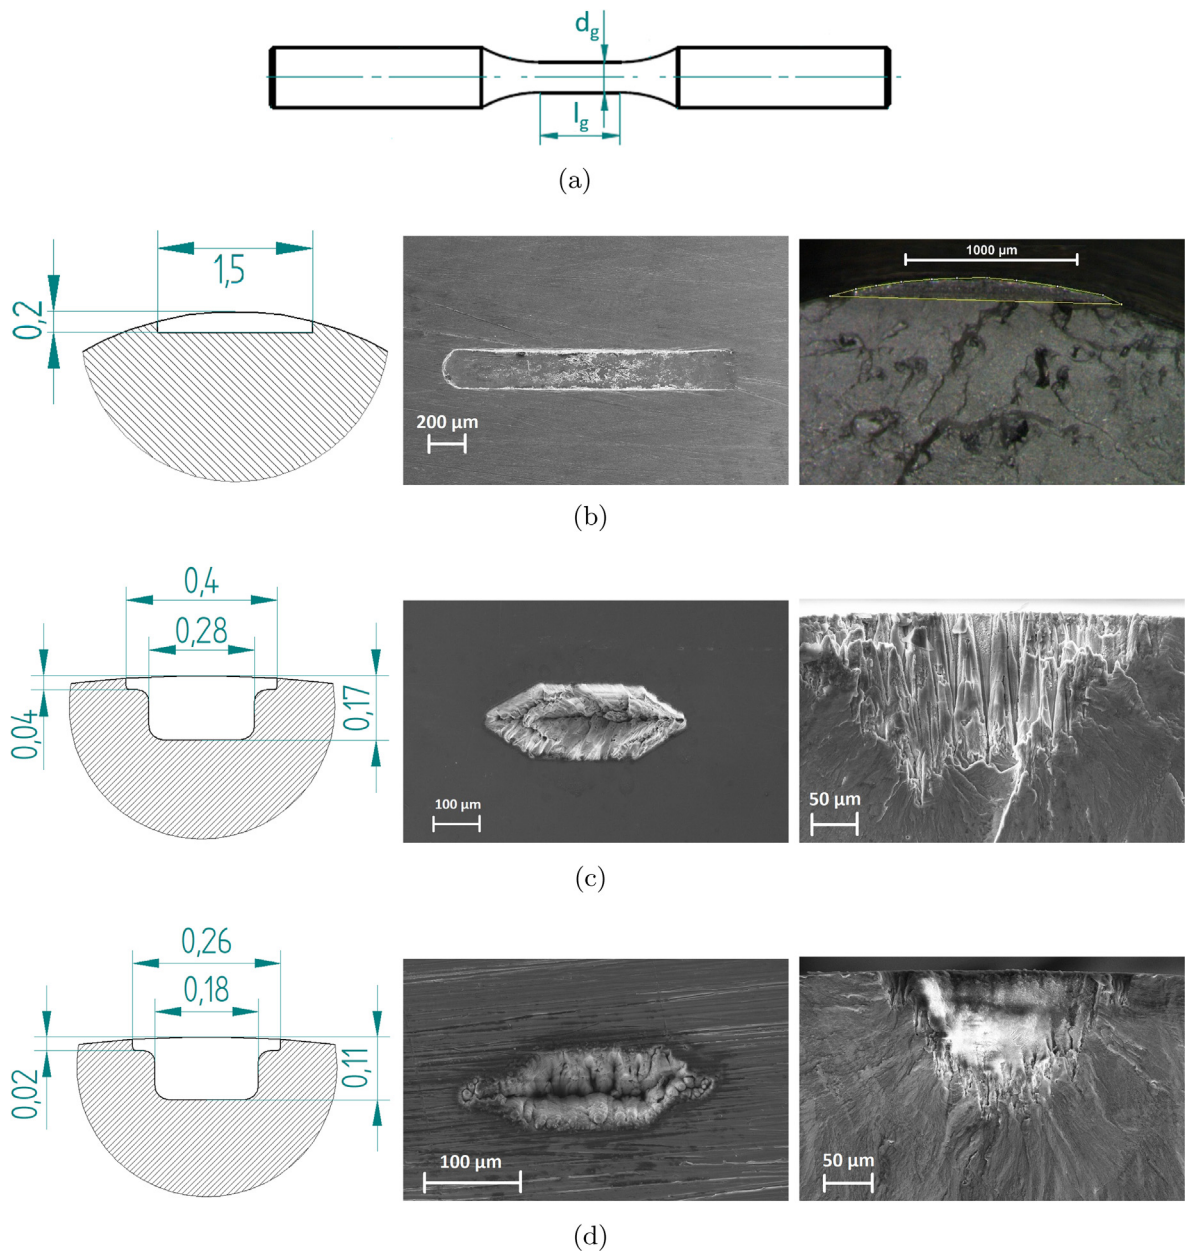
Geometry of the fatigue samples: (a) scheme of the cylindrical specimens and gauge dimensions; Detail of the artificial defects introduced for (b) P1, (c) P2 and (d) P3.
